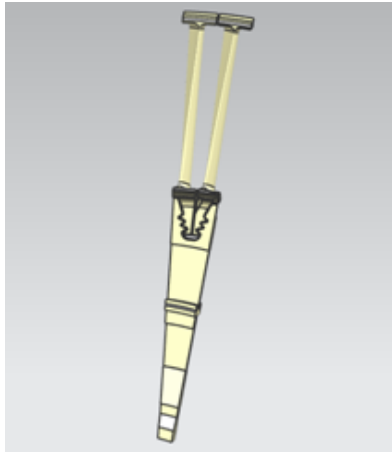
The 1/49 turbine disc segment without assembly holes.
